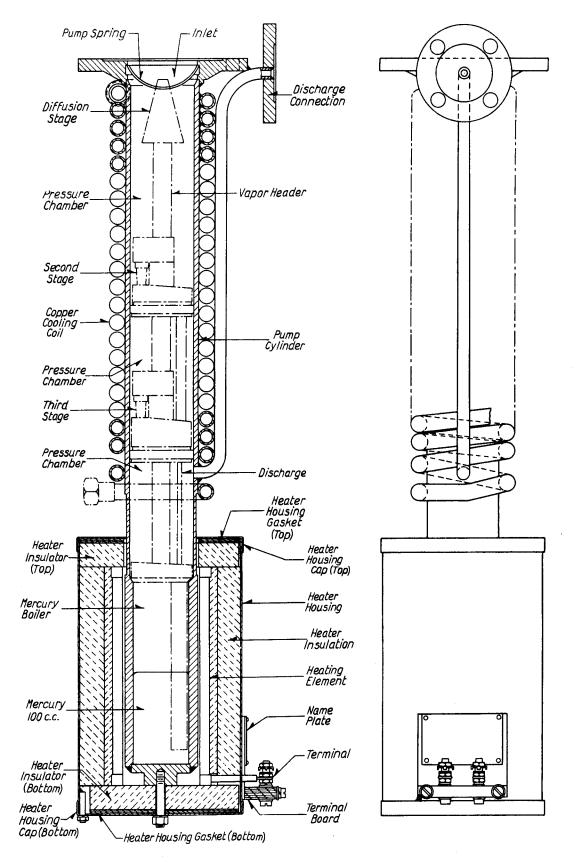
Sectional View of Three-Stage Mercury Vapor Vacuum Pump
